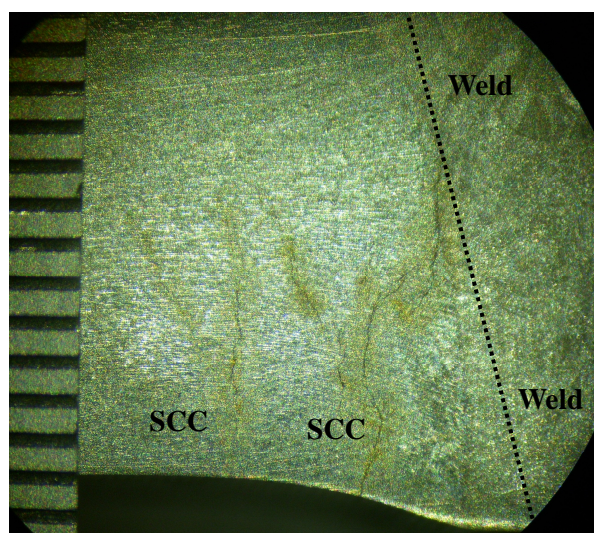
Cross-section of welded area in stainless steel pipe. SCCs were developing near the welded area.
